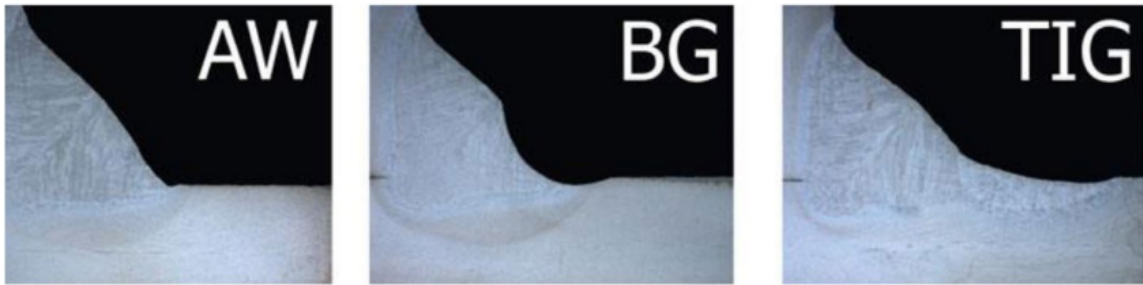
Figure of an as-welded joint followed by the geometrical improvement with the use of Burr-grinding and TIG re-melting (Al-Karawi, 2023).
